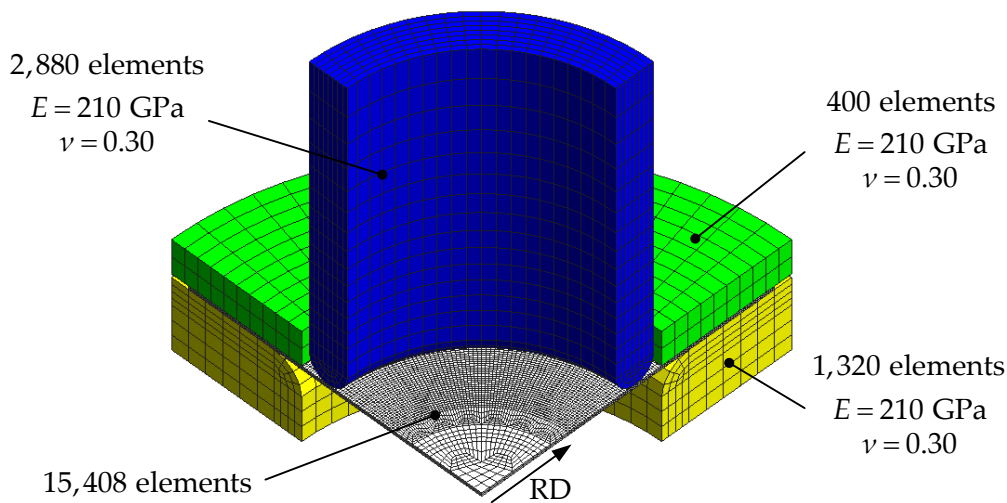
Finite element mesh of the forming tools (punch, blank-holder and die) and blank used in the deep drawing of a cylindrical cup.
